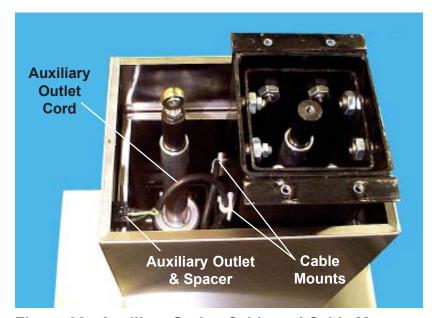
Auxiliary Outlet, Cable and Cable Mounts
